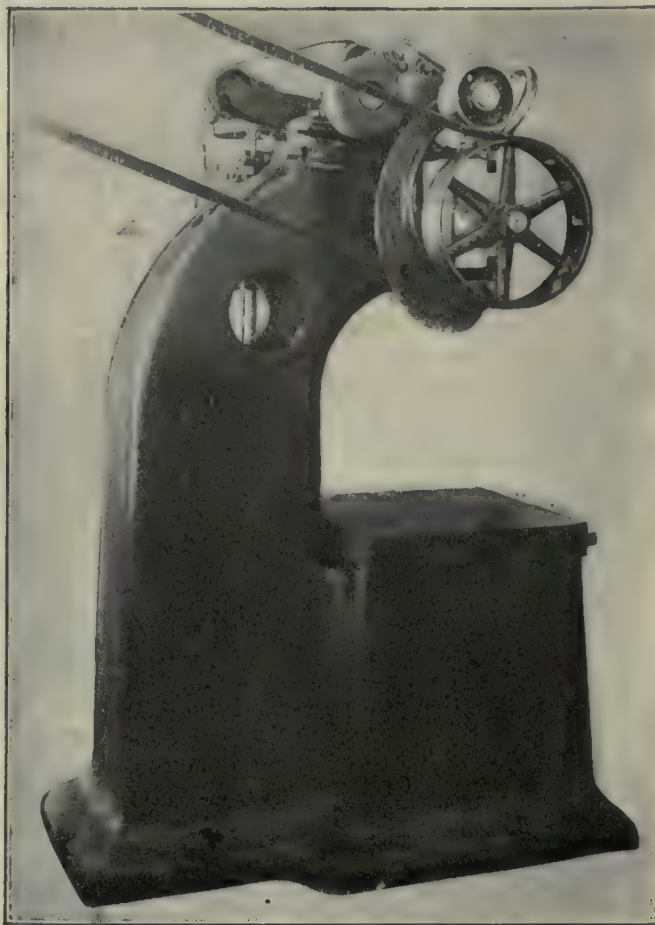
SIDE VIEW OF MACHINE SHOWING TABLE
